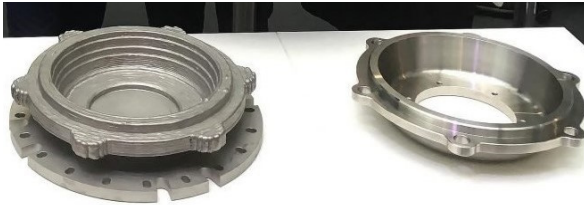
A 3D-printed near-net-shape wheelset bearing cover (left) and a post-machined part (right) [11]
